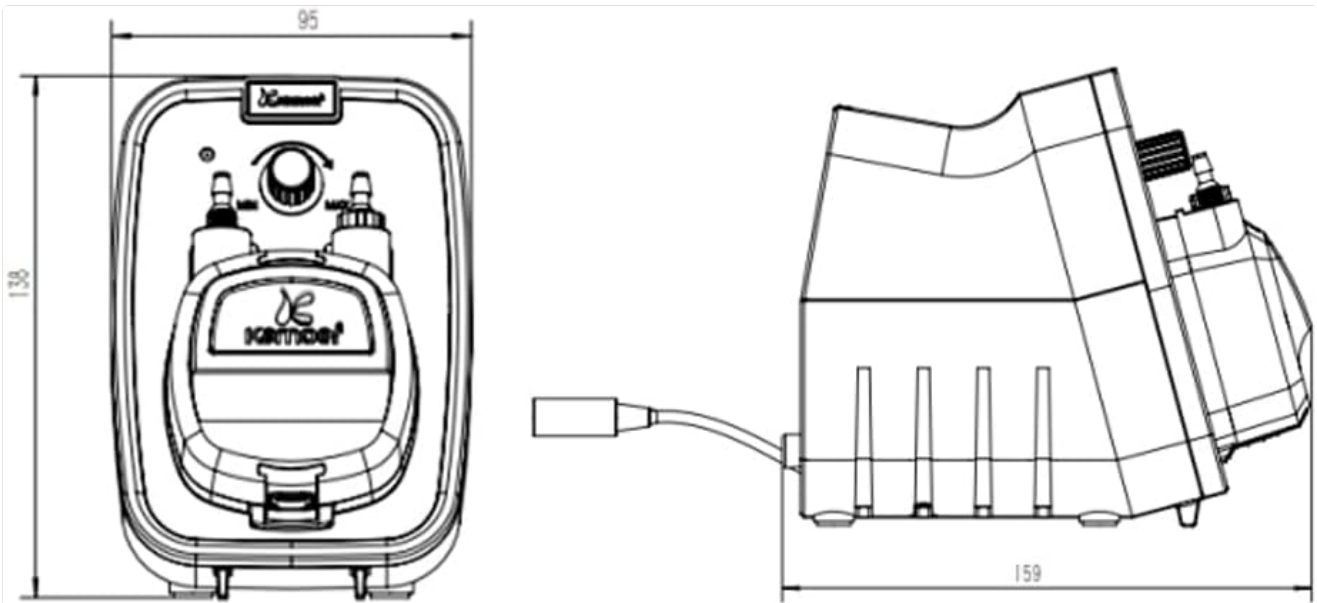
Technical Drawing. A detailed technical drawing illustrating the pump's dimensions from multiple perspectives.
